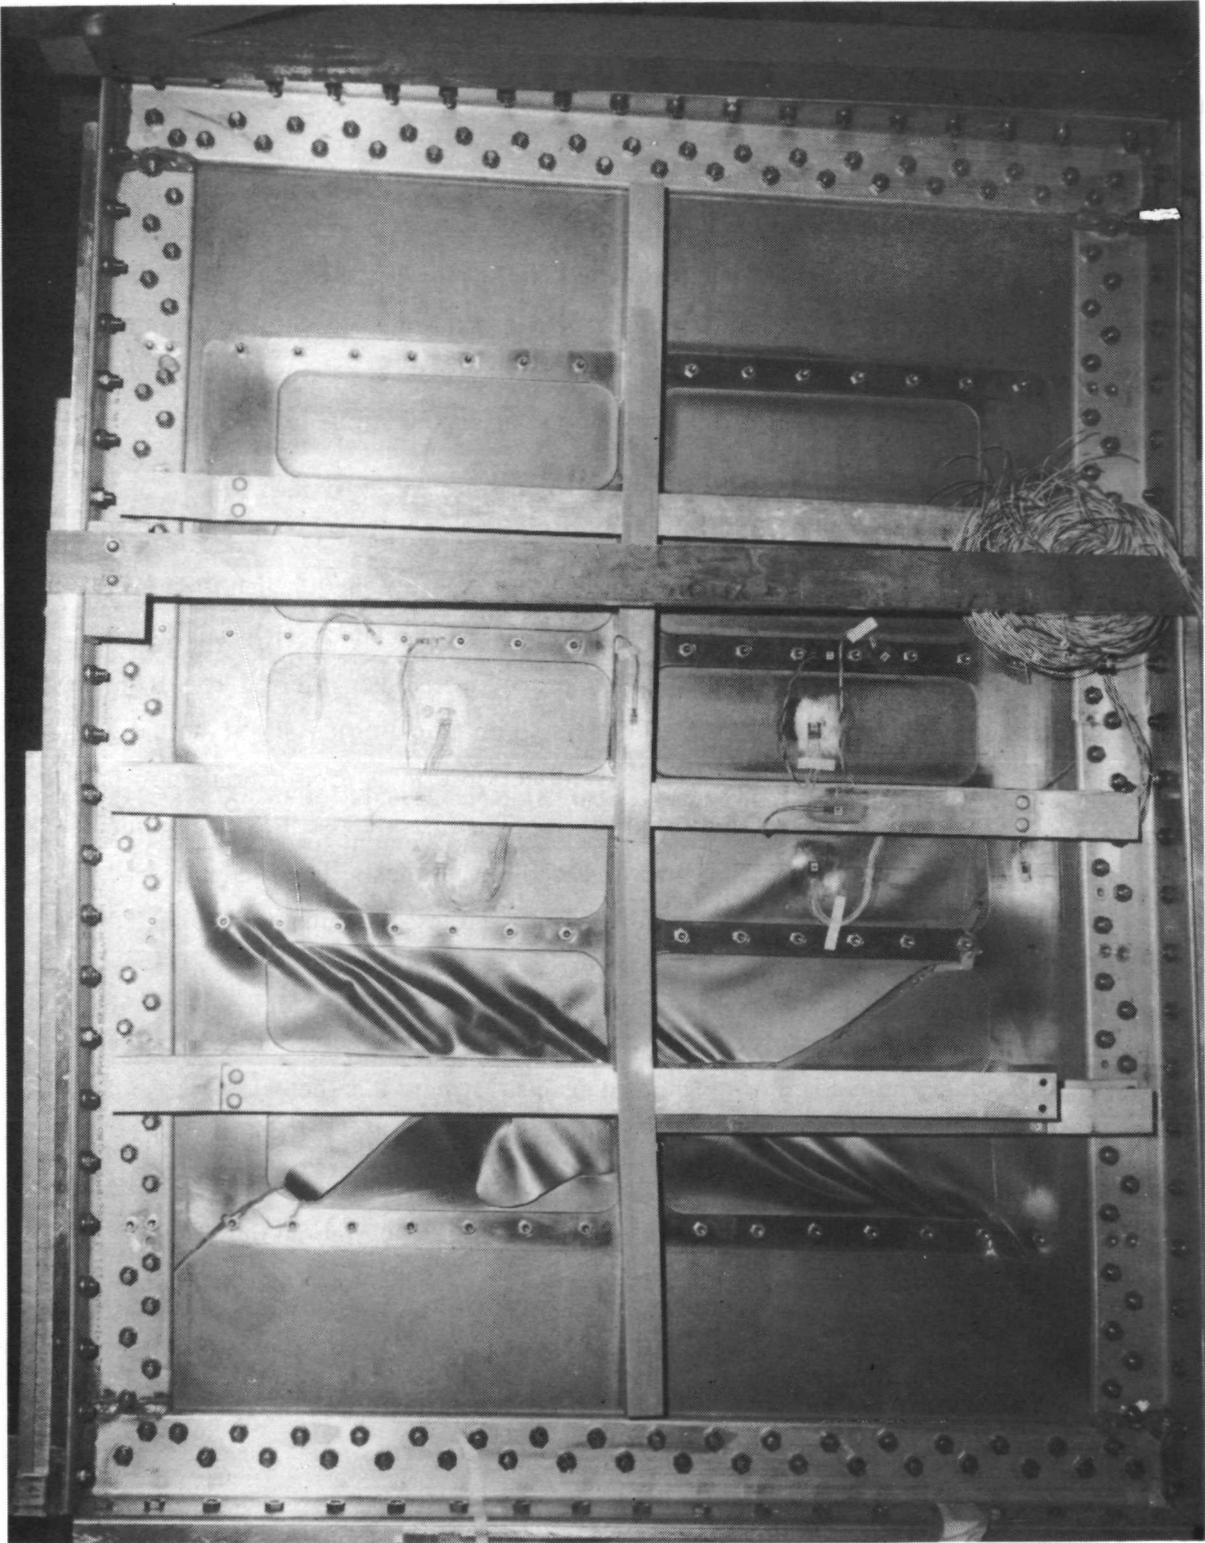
TEST WEB 3 AFTER FAILURE (REAR SIDE)
